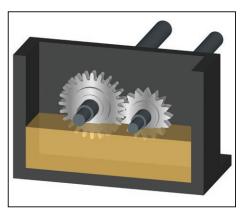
Cutaway view of the FZG test rig showing the sample gearset arrangement.
